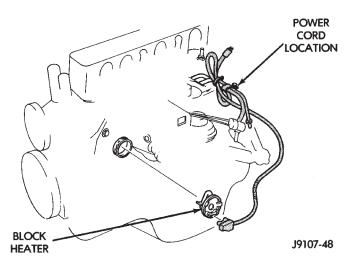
Heater and Cord—XJ with 2.5L 4-Cylinder
